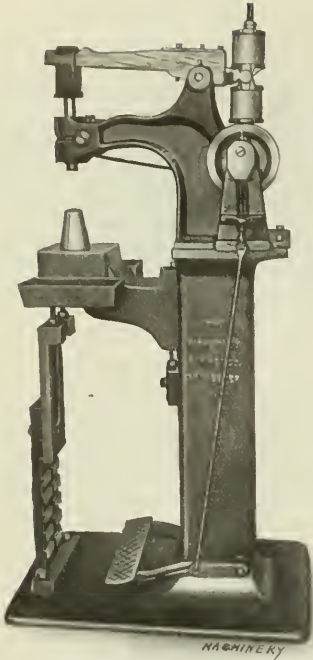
High-speed No. 3A Heavy-duty Riveting Machine
